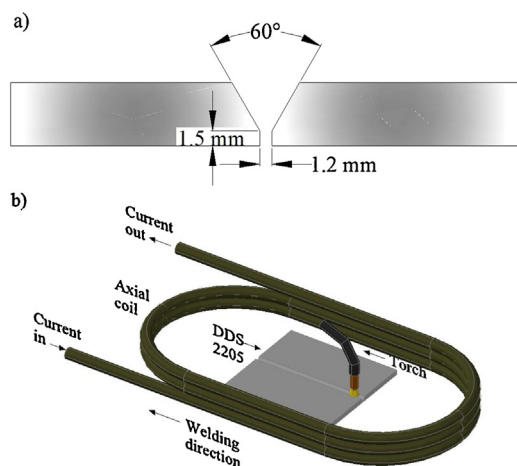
(a) Single V groove preparation of DSS samples for welding, (b) experimental setup for application of magnetic field during welding.
